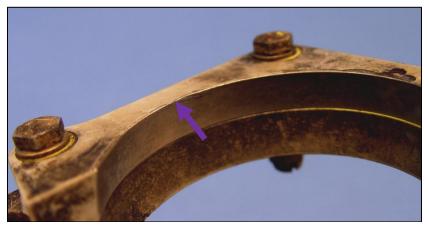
The left rear edge of the #1 bearing rear flange indicated by the purple arrow in Figure 63.
